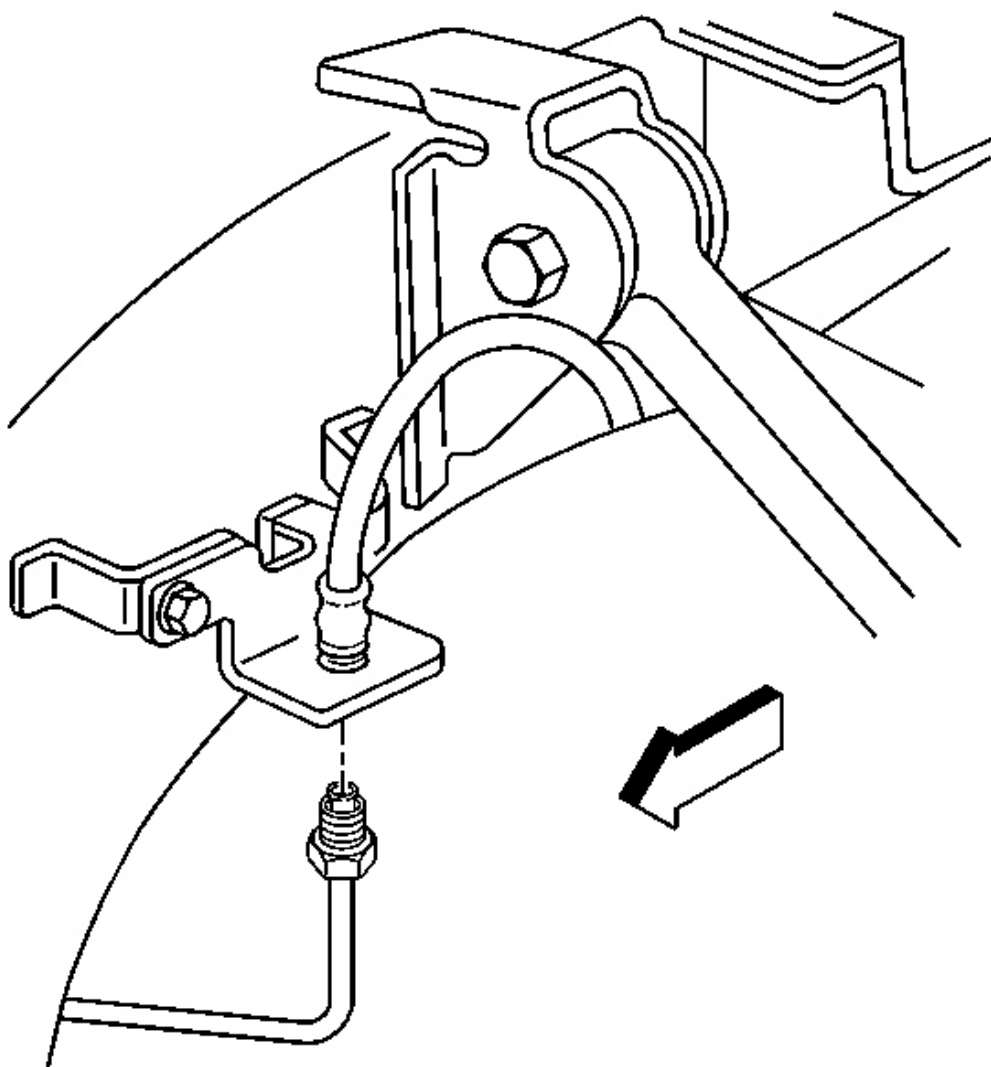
Rear Tire And Wheel Assembly & Brake Pipe Fitting End
